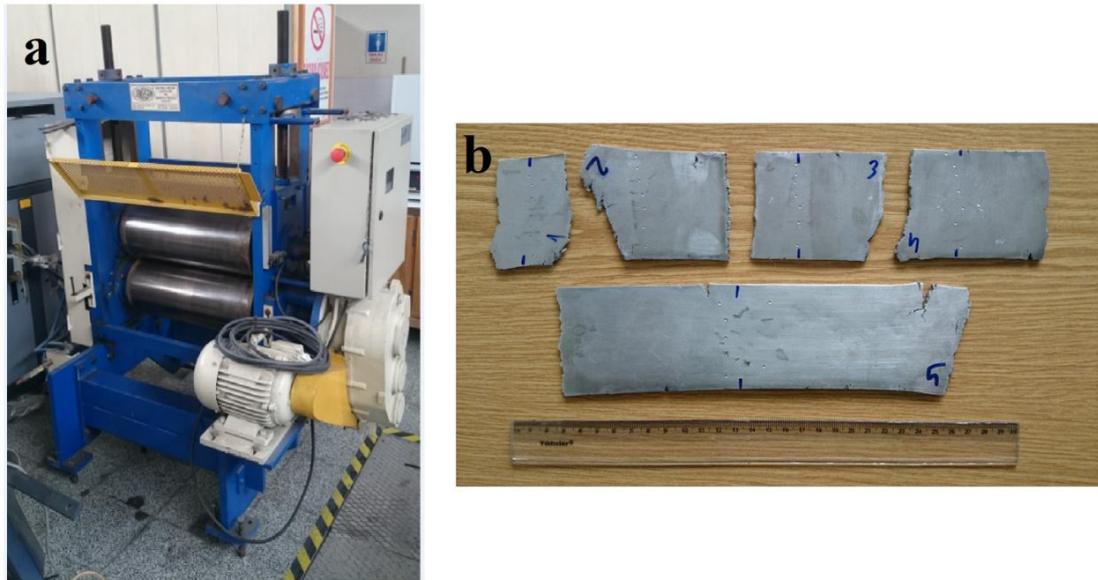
(a) Rolling machine that was used during experiments and (b) hot rolled 7085 aluminum sheets
